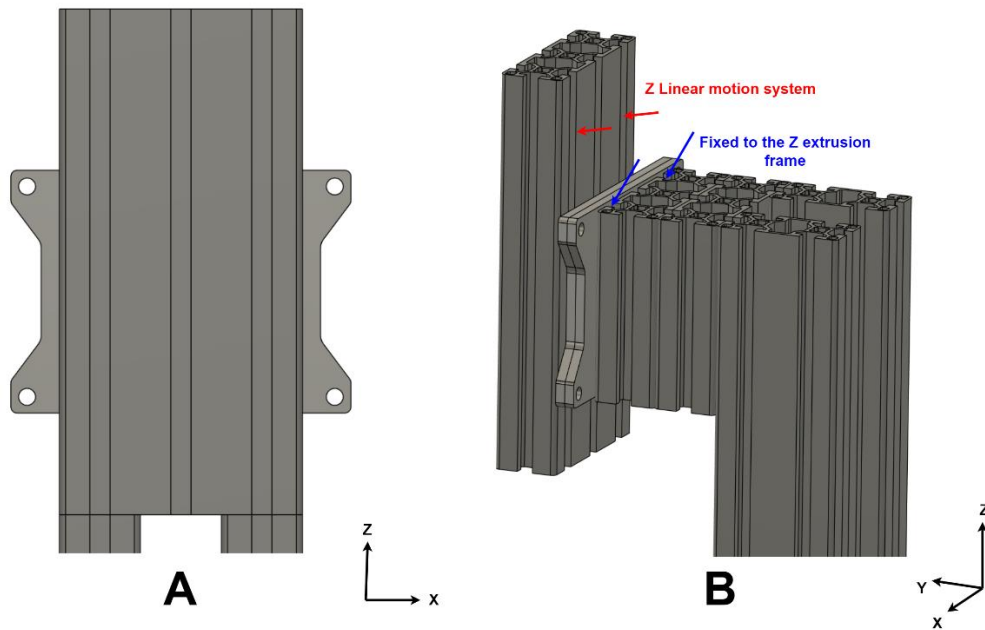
A- Front view of the machine concept, showing the accessibility to the four corner mounting fasteners. B - Rear right view of the machine, demonstrating how the two plates will be independently assembled to the frame and Z-axis and later interconnected.
